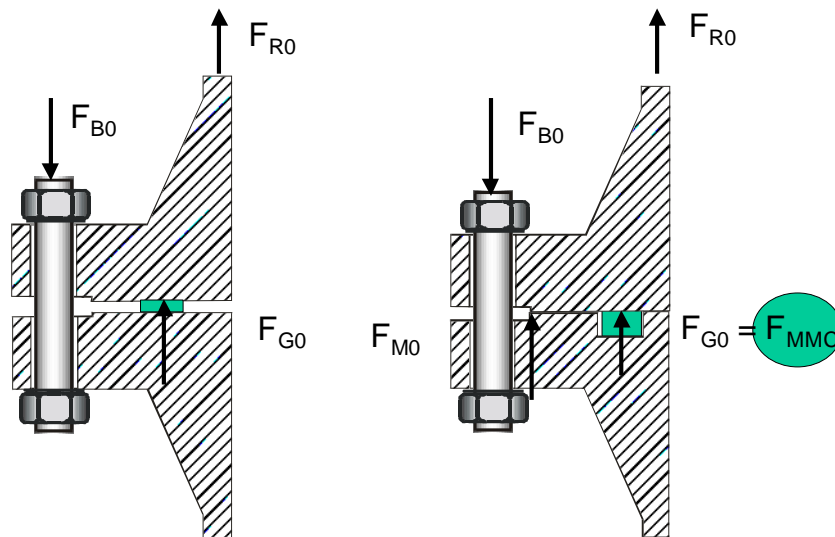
Force balance in the assembly state for floating (left) and metal-to-metal contact type (right)
